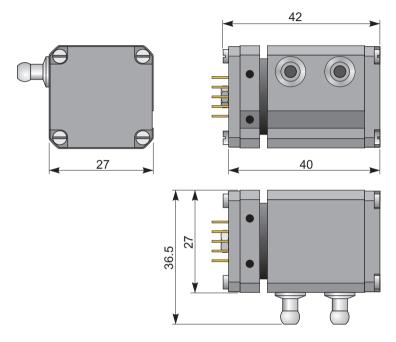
DX6106.C40 gas sampling cell outline dimensions (in millimeters)
